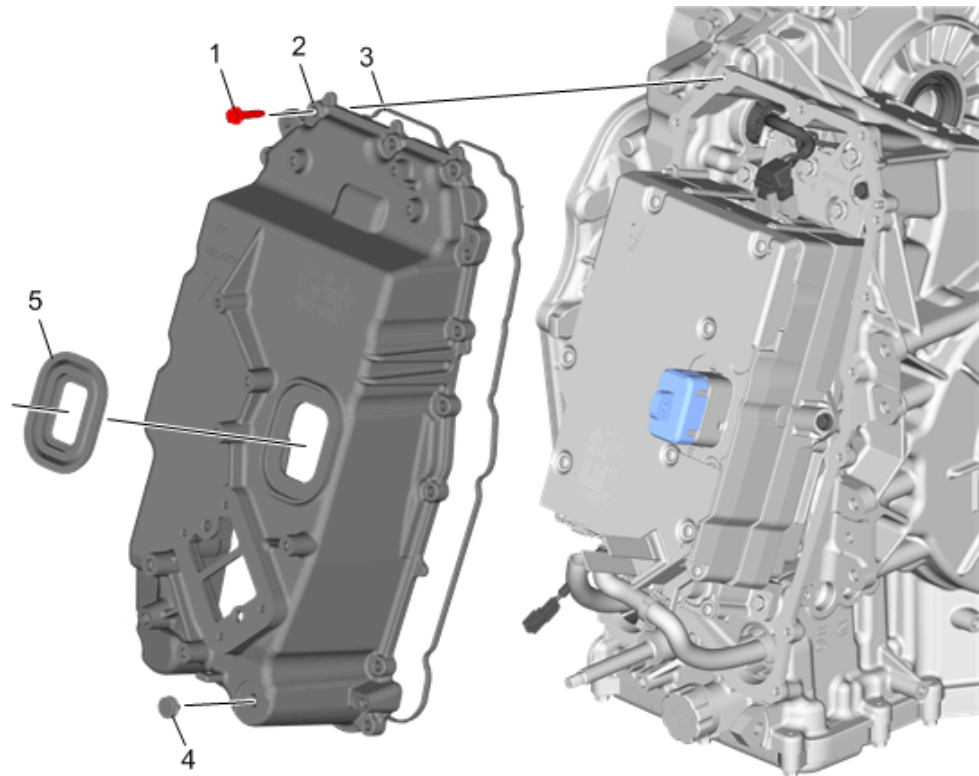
Drive Motor Power Inverter Module Cover And Components
